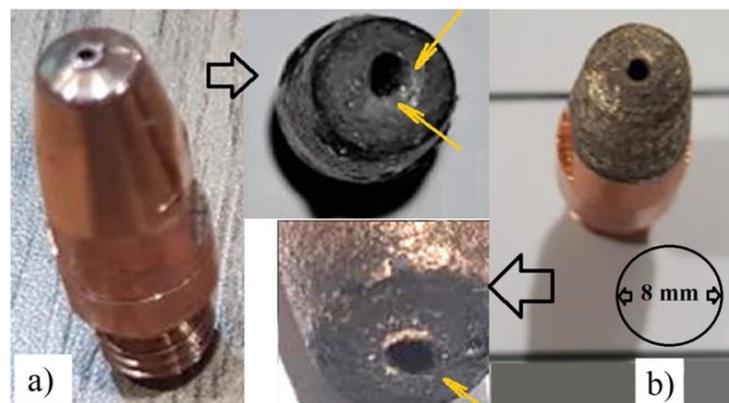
Figure. GMAW weld contact tips before and after NiAl coated by ESD process.
